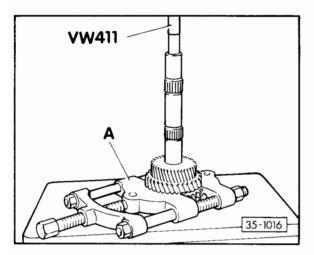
Pressing off 3rd gear with 2nd gear wheel
